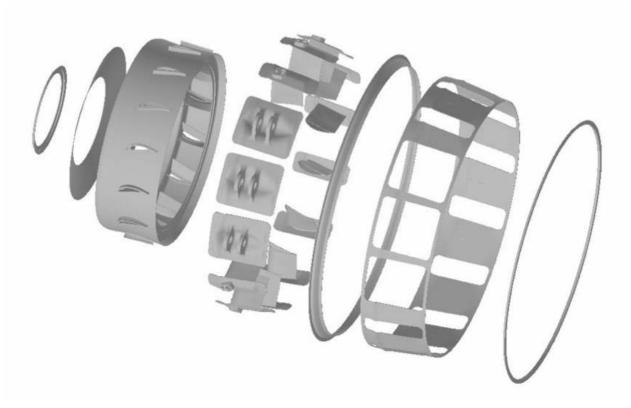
An example of an Engine component product in exploded view showing a set of joint interfaces.
